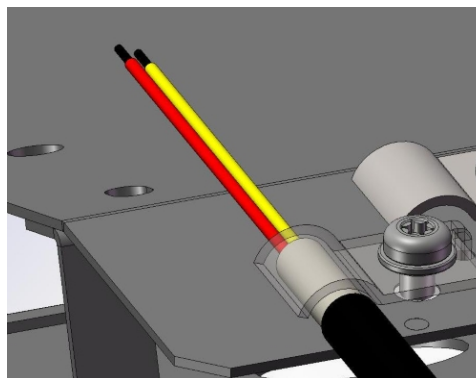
Thick Shielded Cable (> approx. 7 mm)
